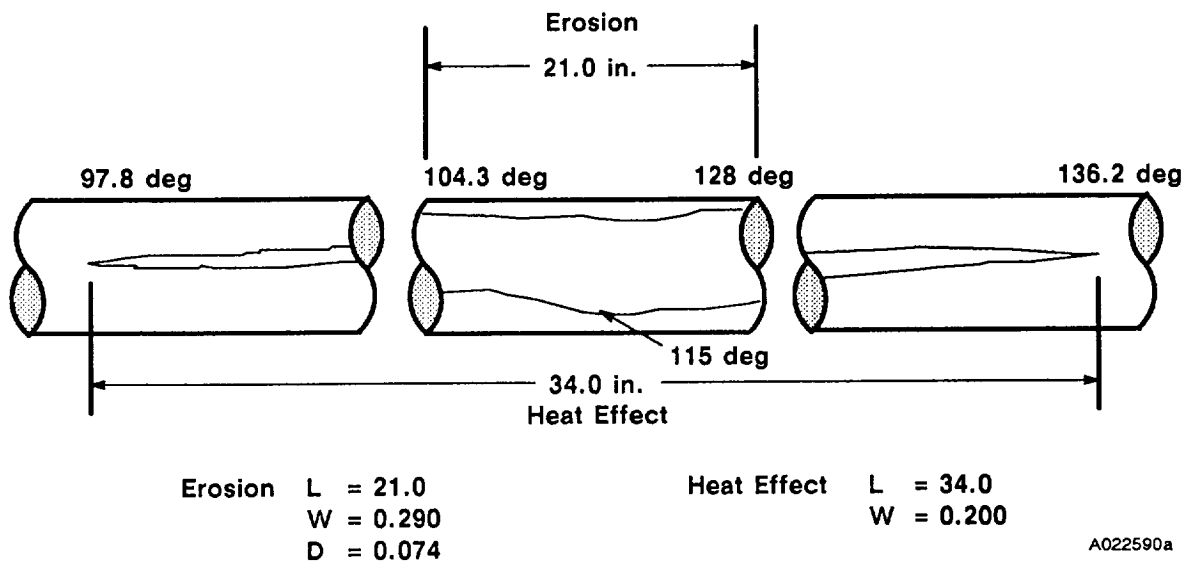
Case-to-Nozzle Joint Primary O-ring Erosion
